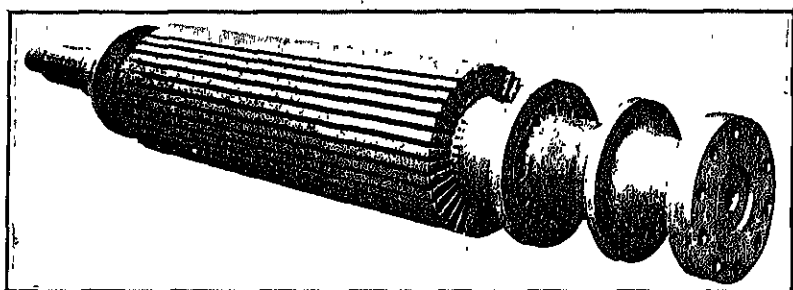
Completely machined rotor without winding for 12,500-kva turbo-generator.
